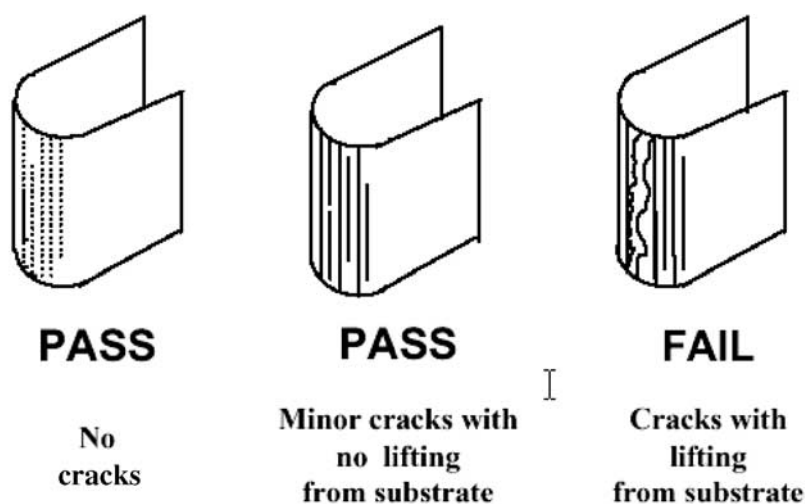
180-degree bend test illustrating pass and fail appearance.
